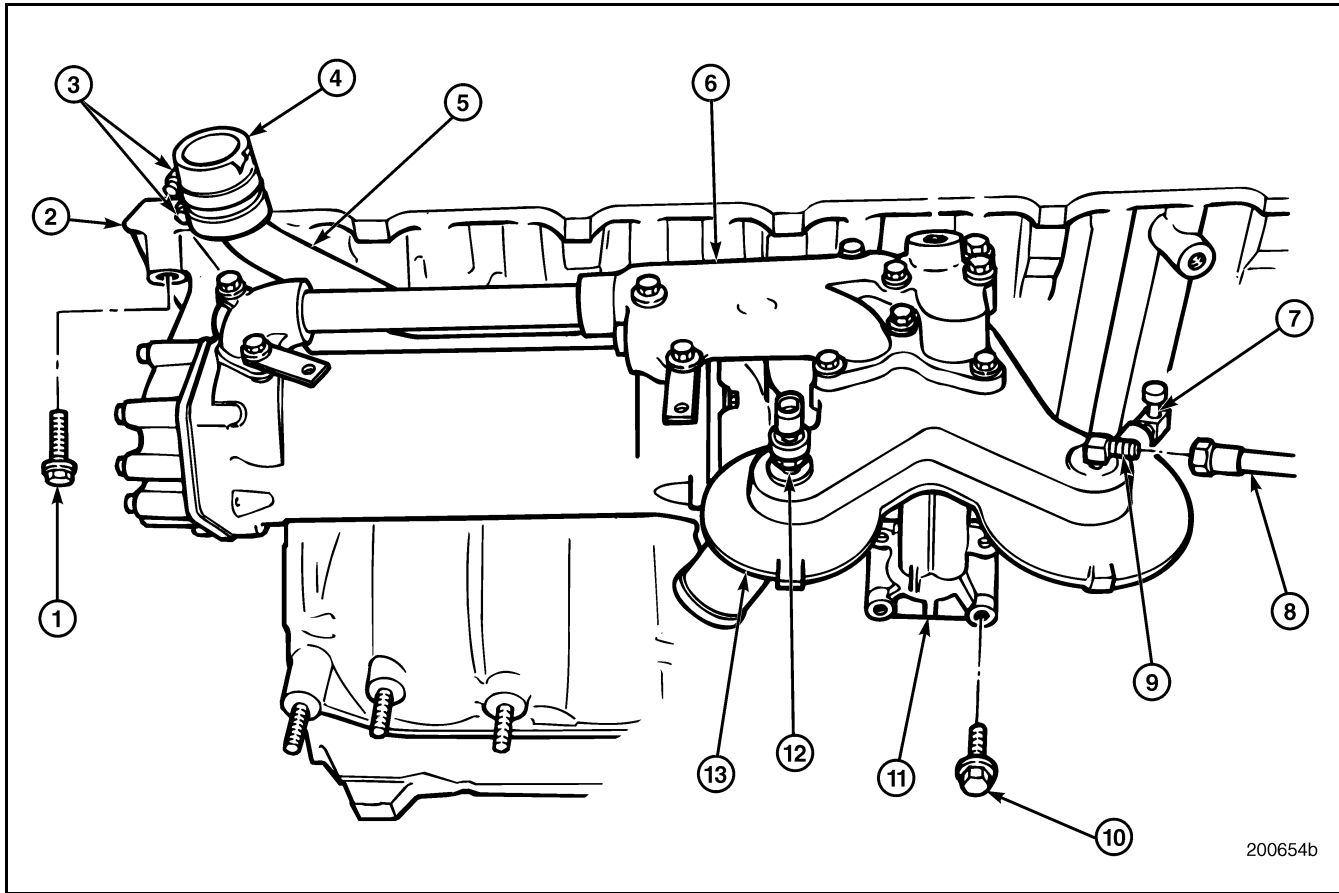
Removable Bundle-Type Oil Cooler and Oil Filter Mounting Bracket Assembly Installation
